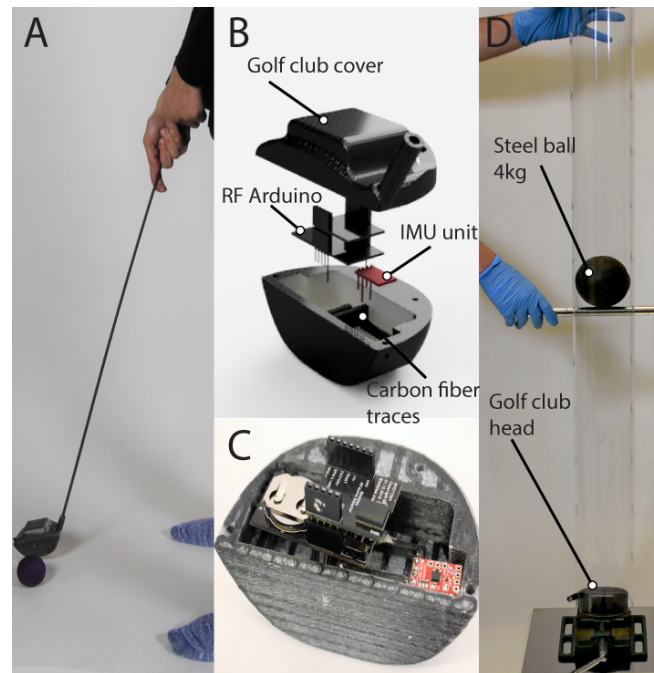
a) Shows the golf club with a user b) Shows the exploded view of golf club with RFduino and accelerometer c) Shows the top view of the fabricated sample d) Shows the drop ball impact test of the golf club head.
